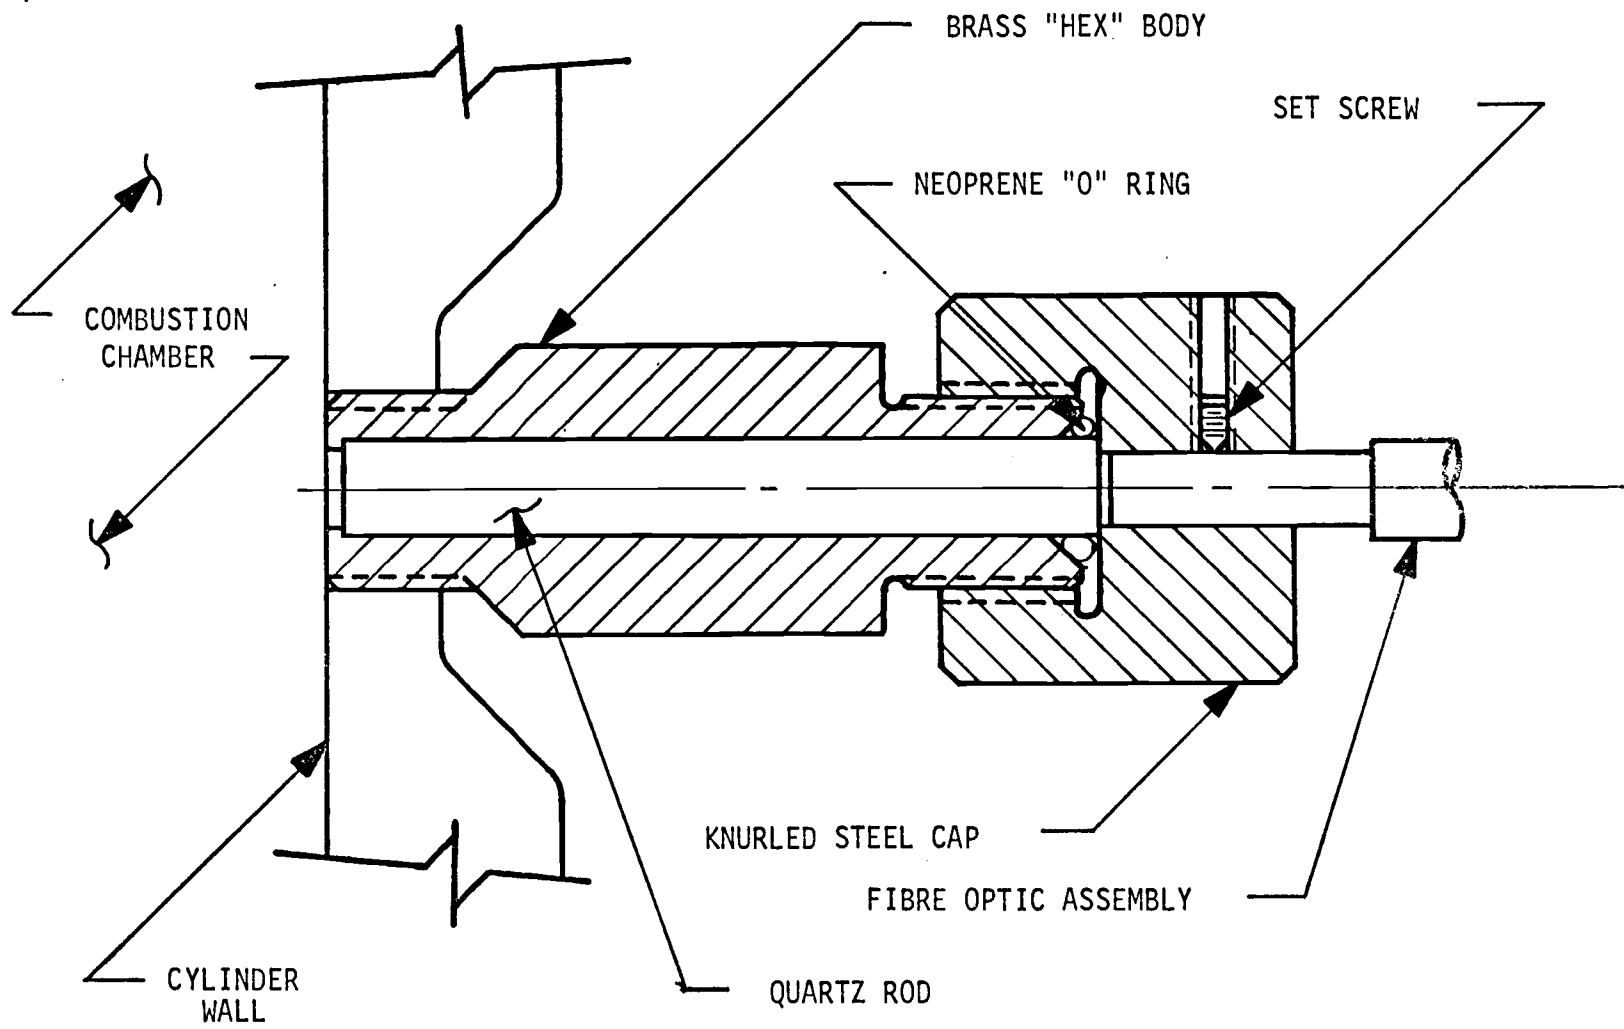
Quartz combustion chamber window and fibre optic assembly attachment.
